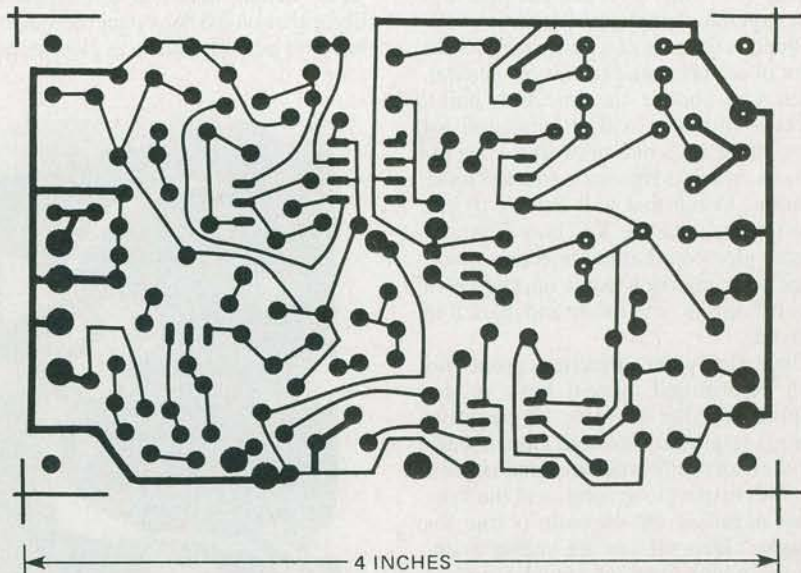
SINGLE-SIDED PC BOARD is small enough to fit comfortably inside most TV sets.
